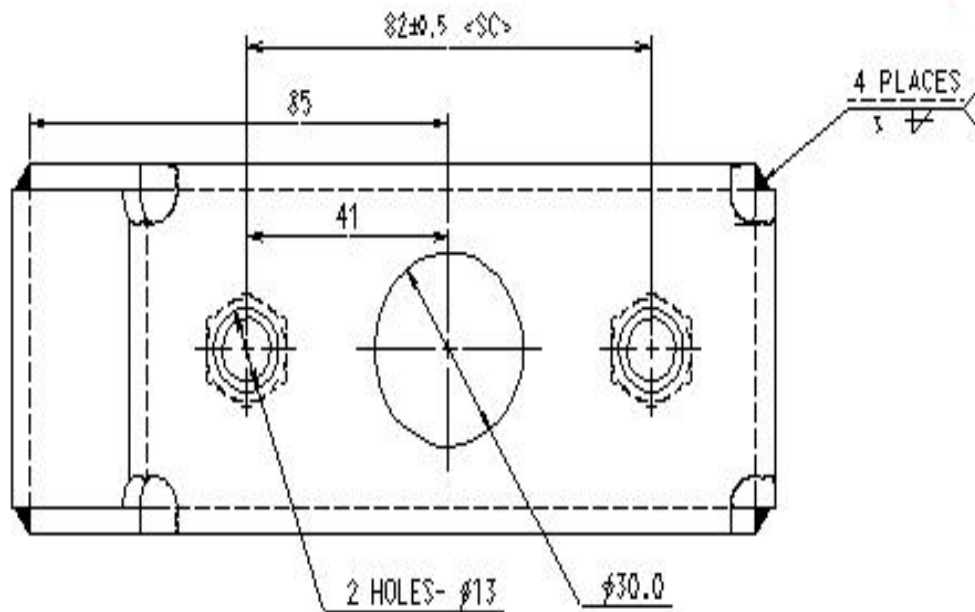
first modified design of the mounting bracket (All Dimensions are in mm)
